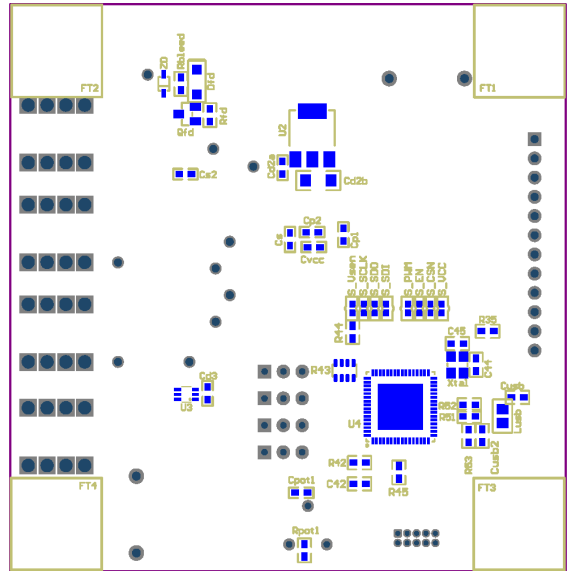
NCV7535 EVB PCB Bottom Assembly Drawing
